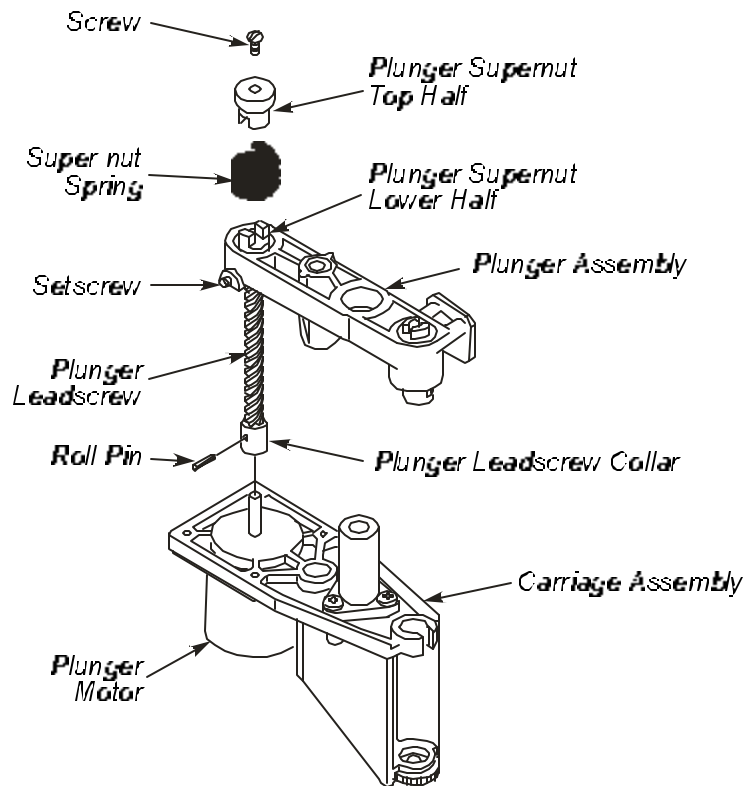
35 Removing the Plunger Leadscrew/Supernut Assembly.
